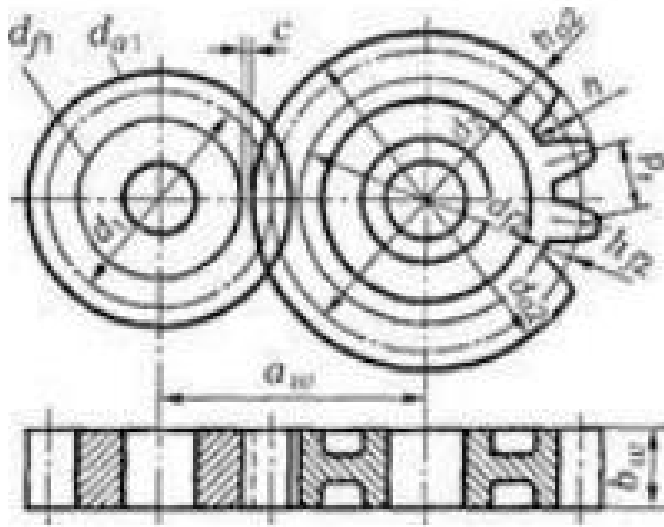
Main geometric parameters of gear drives with tooth profiles
